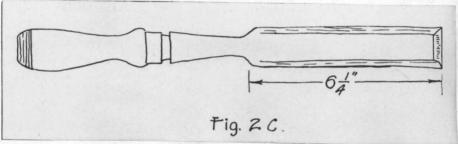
illustrates the firmer type of chisel with a blade of six and one-fourth inches measuring from cutting edge to shoulder. It is still more substantial chisel, adapted to medium heavy work.
